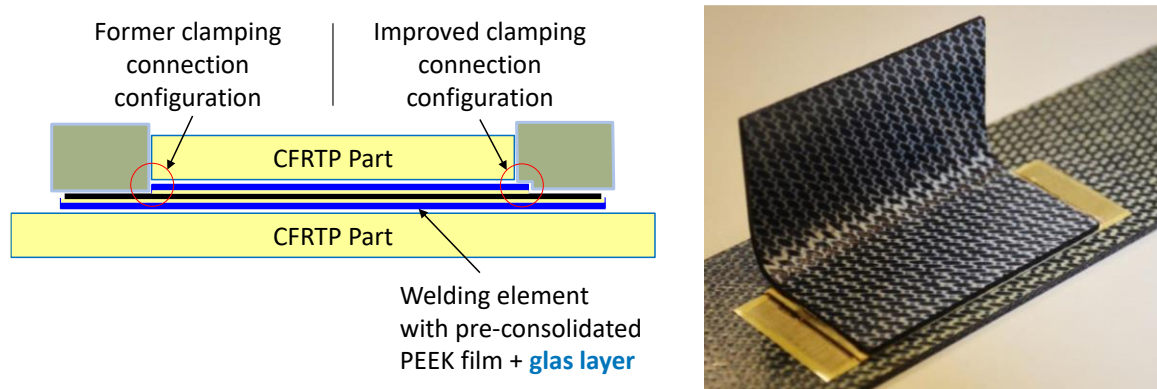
Former and improved clamping connection and welding element configuration (left) and the automated welded demonstrator (right)
